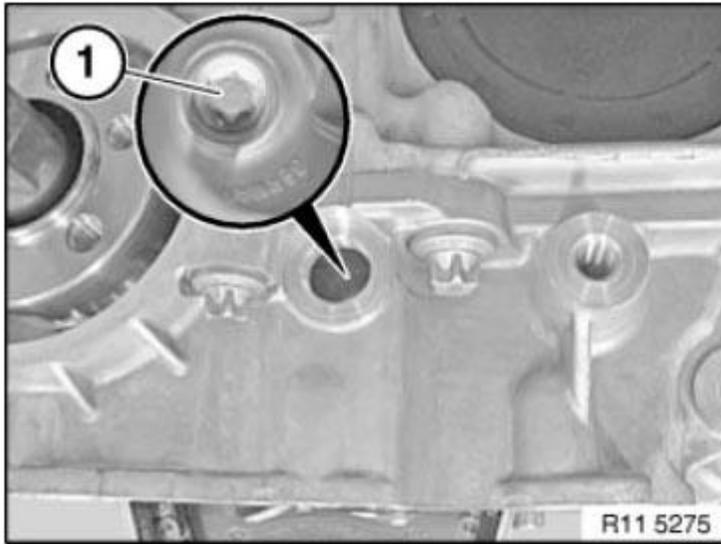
Identifying Oil Pump Triangular Drive Mounting Screw
